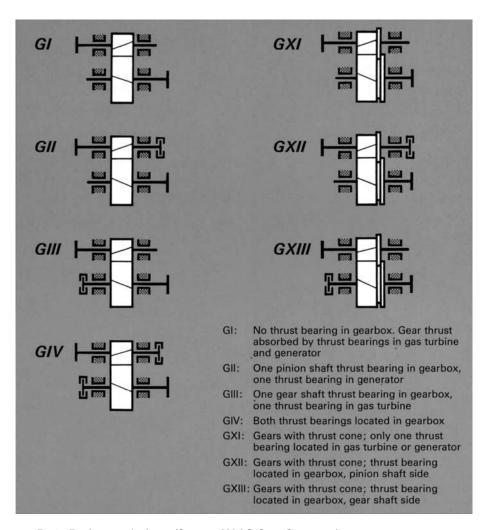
Basic gear designs. (Source: MAAG Gear Company.)
